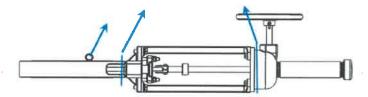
Knife Gate Valve with Bevel Gear Actuator, Horizontal Lifting
